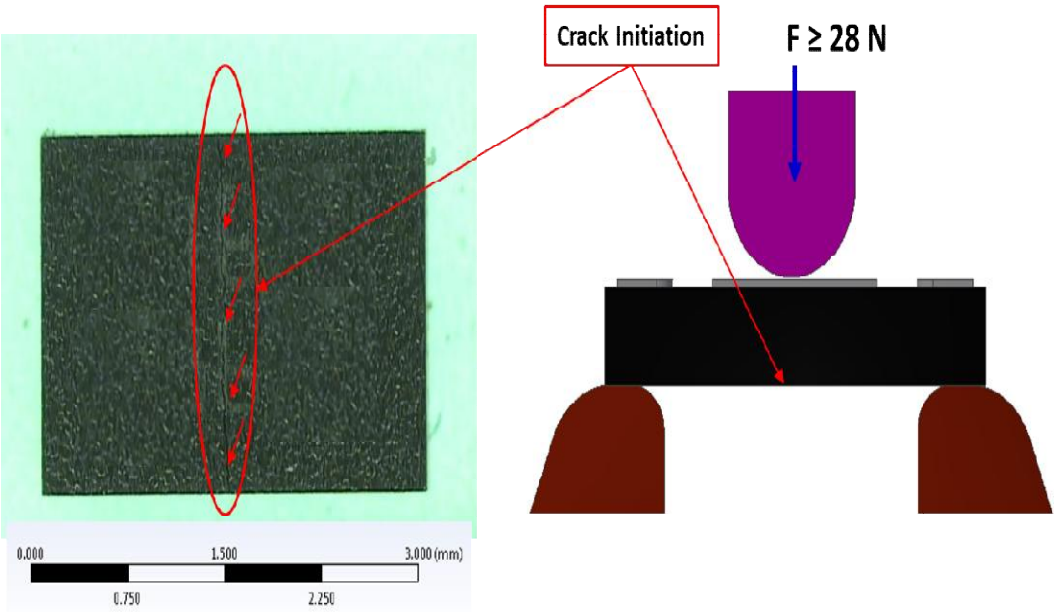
Crack signatures for the tested package not mounted on PCB in Fig. 5a
